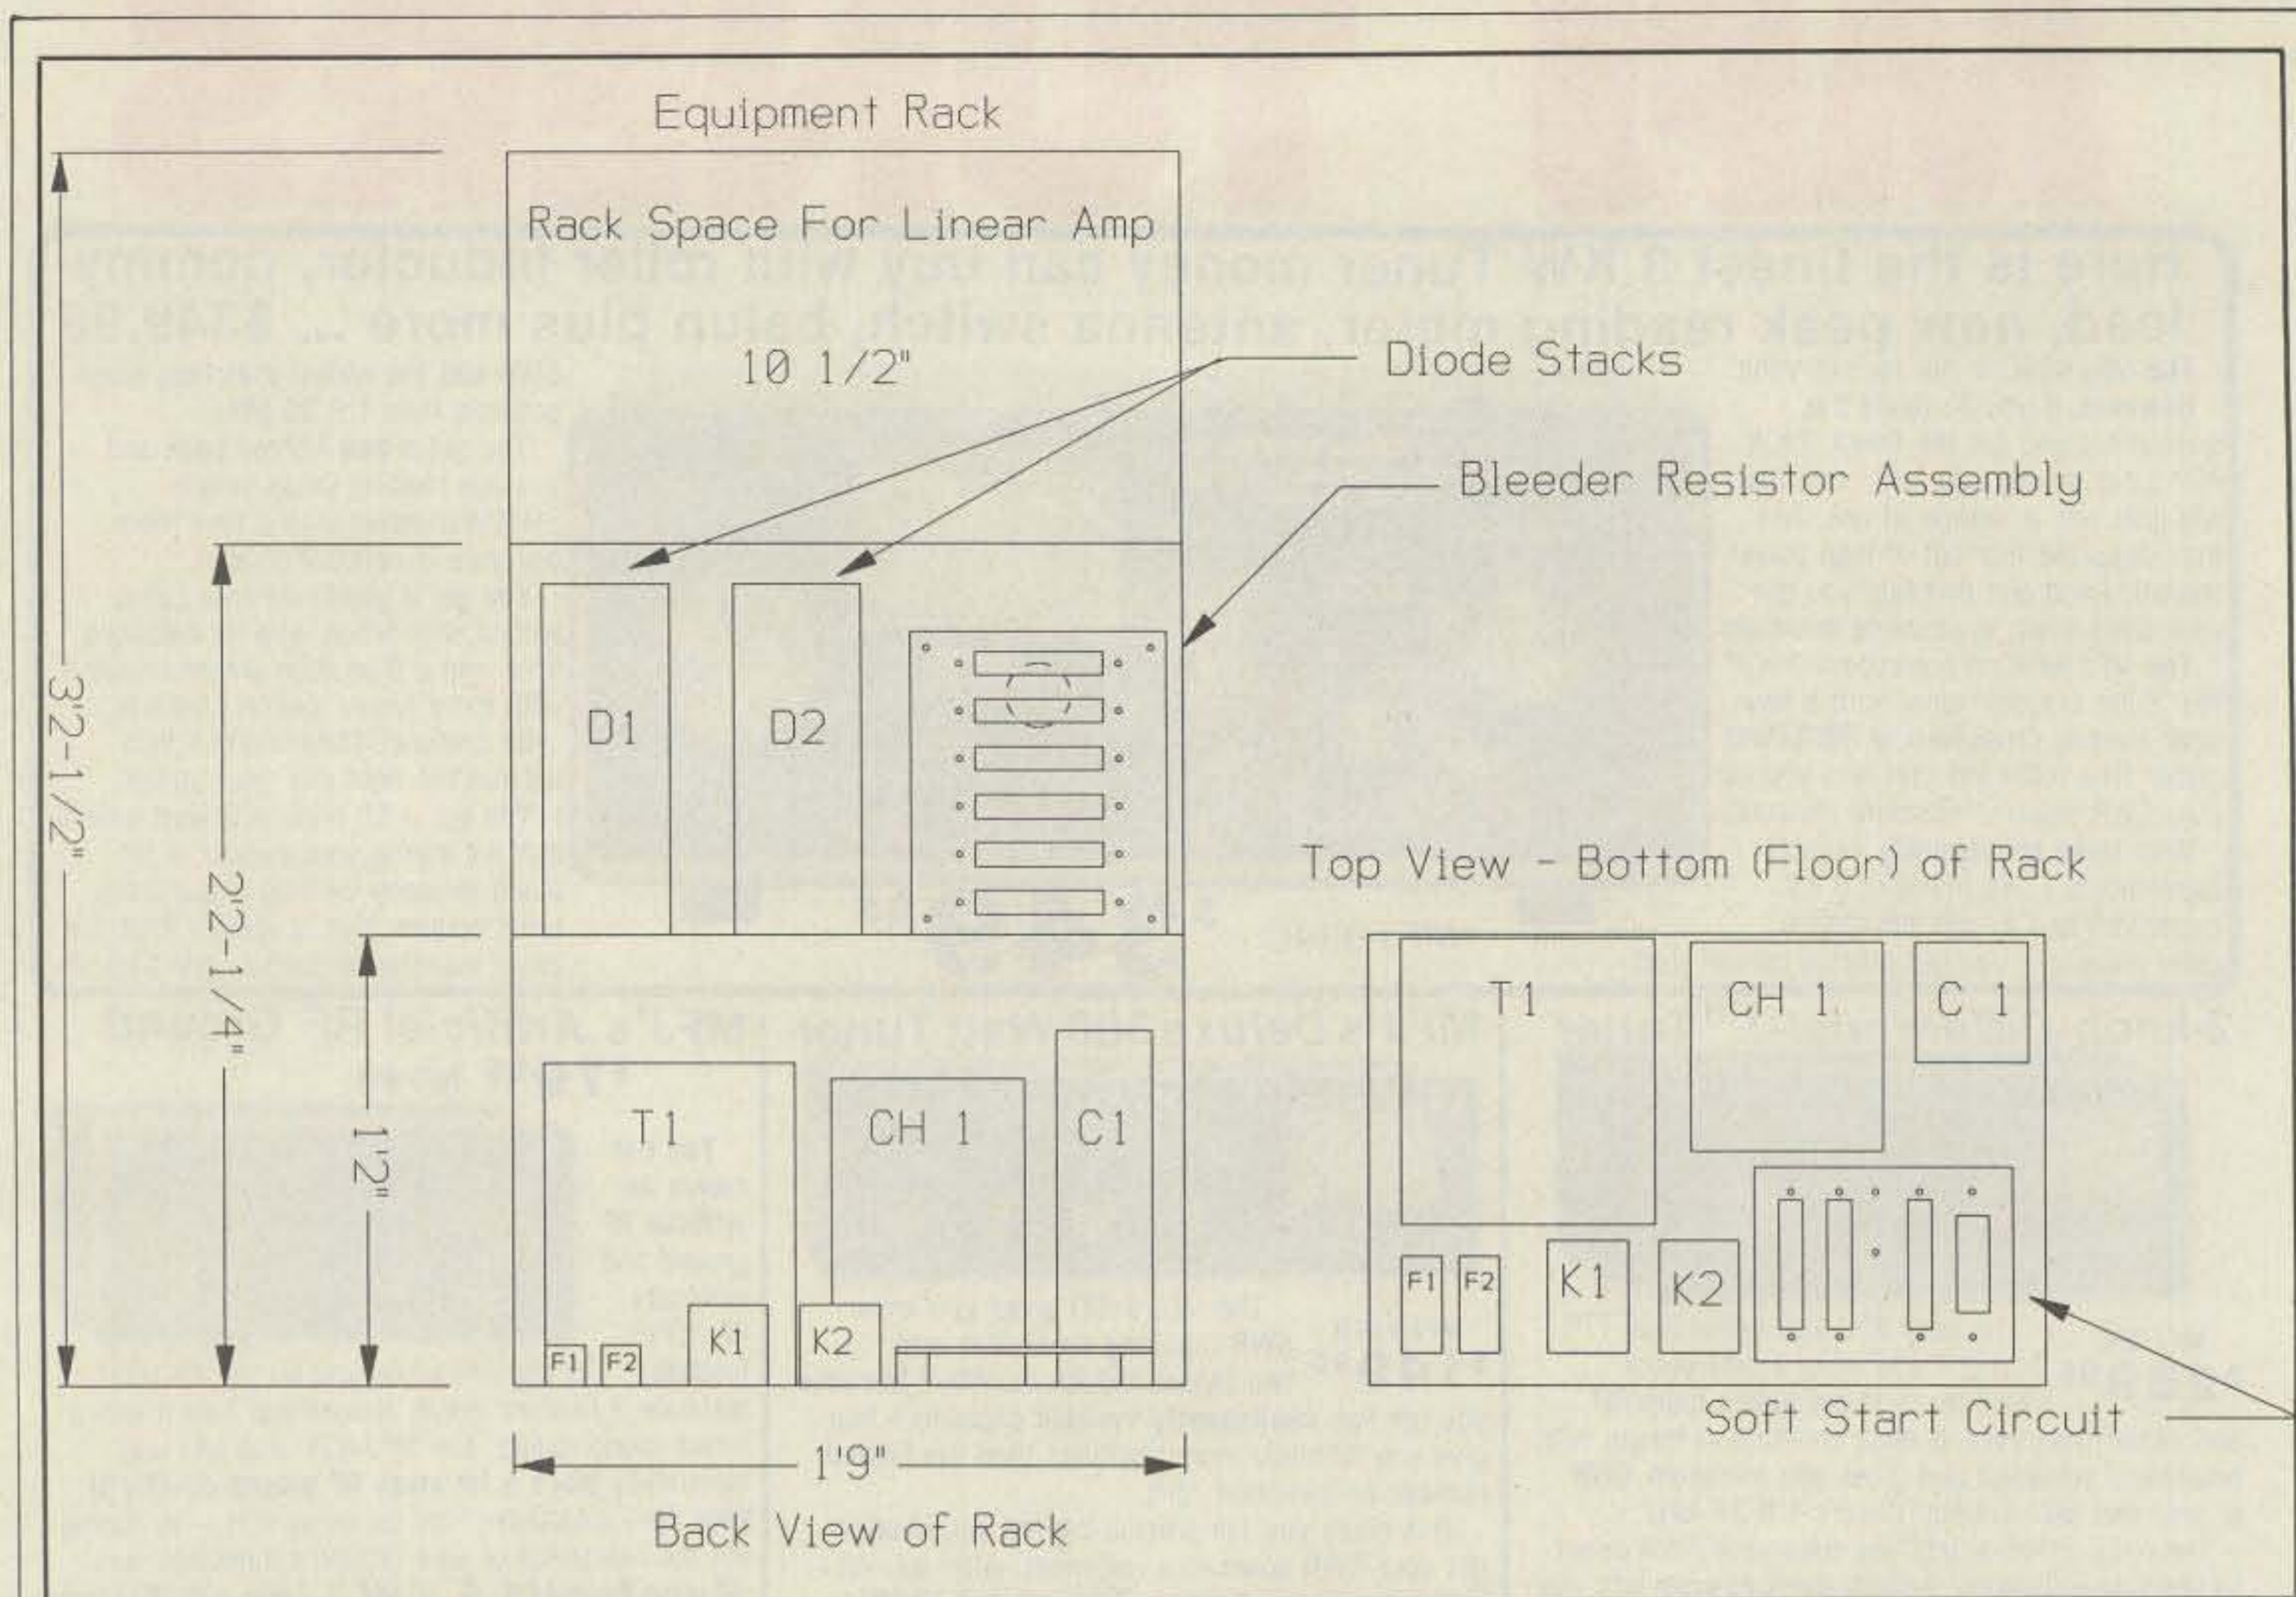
Parts placement and assembly details for the power supply when mounted in a rack.
